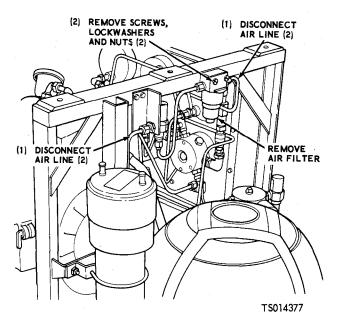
Air line filter and back pressure valve, removal and installation.
